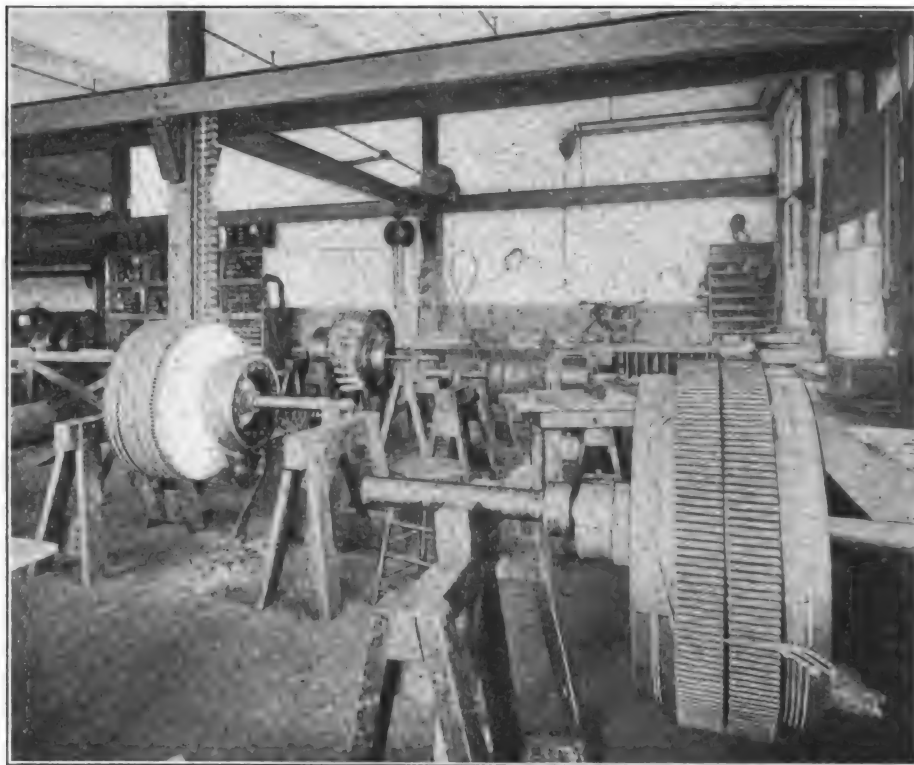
ARMATURES BEING WOUND IN ELECTRICAL DEPARTMENT.
